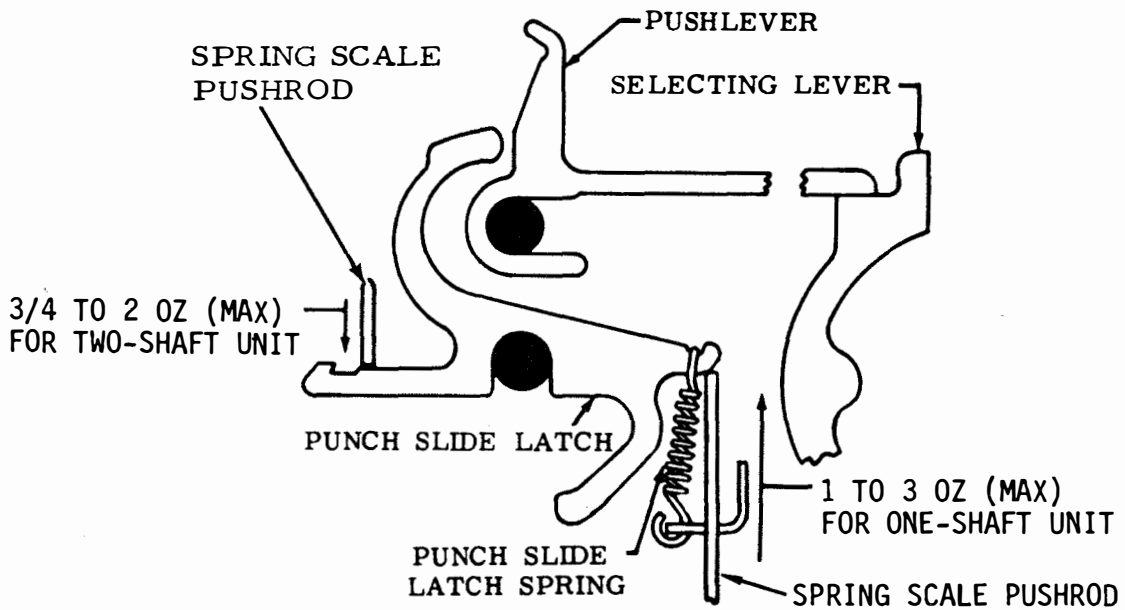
Punch Slide Latch Spring (For Fully Perforated Tape), Front View
